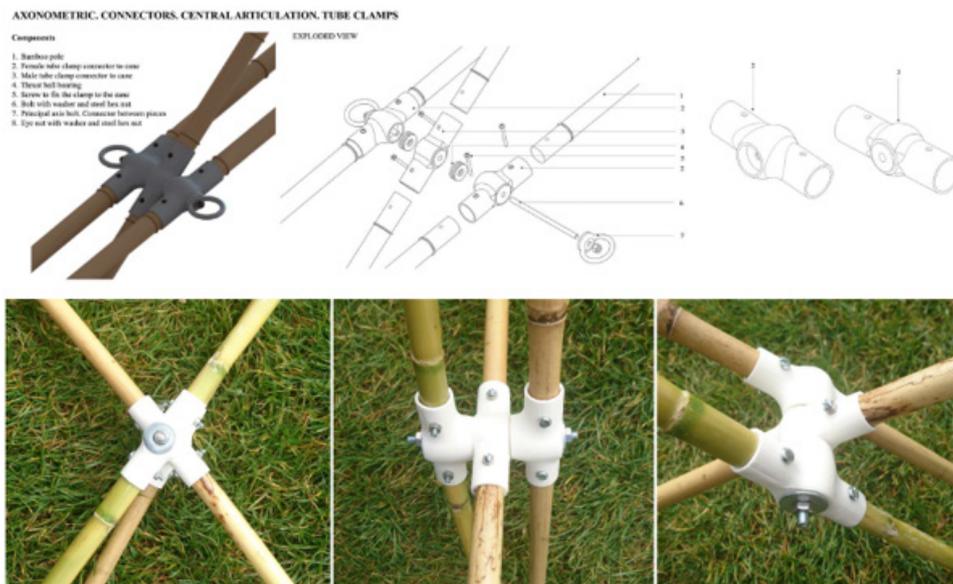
Detail of the components of the type 2 double-hinged axial joint designed in solidworks. b. Photos of the 3D printed joint using wild cane bars on real scale.
